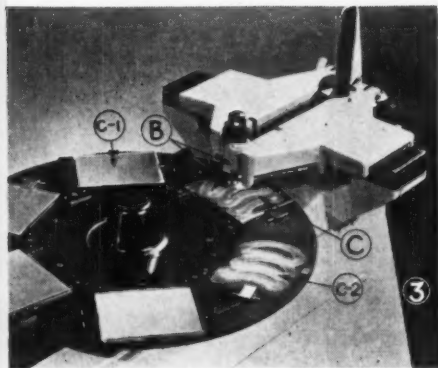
shows the tracer rollers (A) in contact for tracing section "A-A" of the blade, and scribing cutters (B) scribing the A-A profile on the Pant-O-Scribing Glass (C). (C-1) shows the unscribed and (C-2) the finished scribed glass as the table automatically rotates clockwise in synchronization with the automatically controlled tracing arms, scribing cutters, and indexing of the blade.
